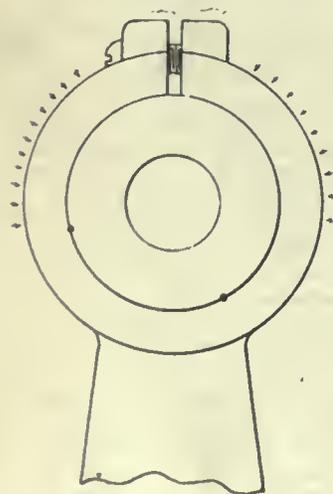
CLOSING A QUILL BEARING. FIG. 6—THE VEE ANGLE PLATE FOR LATHES.
